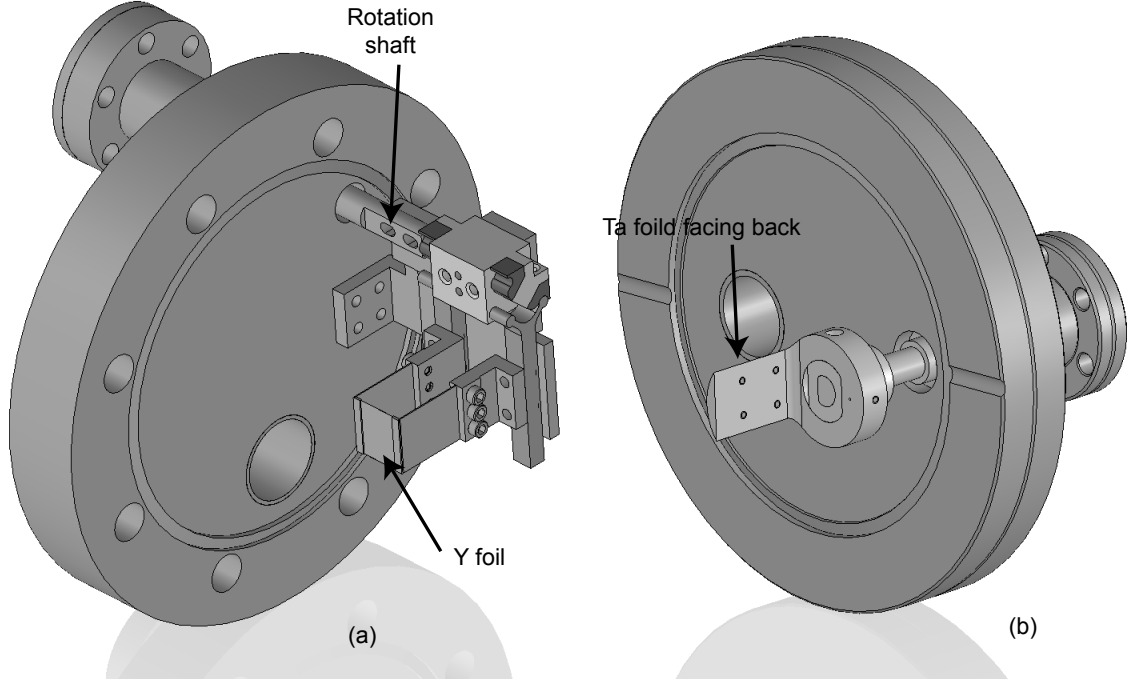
Modular designs for the neutralizer chamber assembly. The 4.5 inch CF flanges have 1.33 inch CF half nipples directly welded to it, such that mechanical rotation and electrical feedthroughs (not shown) are conveniently attached. The modularity eases with handling, which is especially important when radiation safety concern is involved. (a) Y (neutralizer) assembly. (b) Ta (source for ^{221}Fr) assembly. Clearance holes on the 4.5 inch CF flange is obviated.
